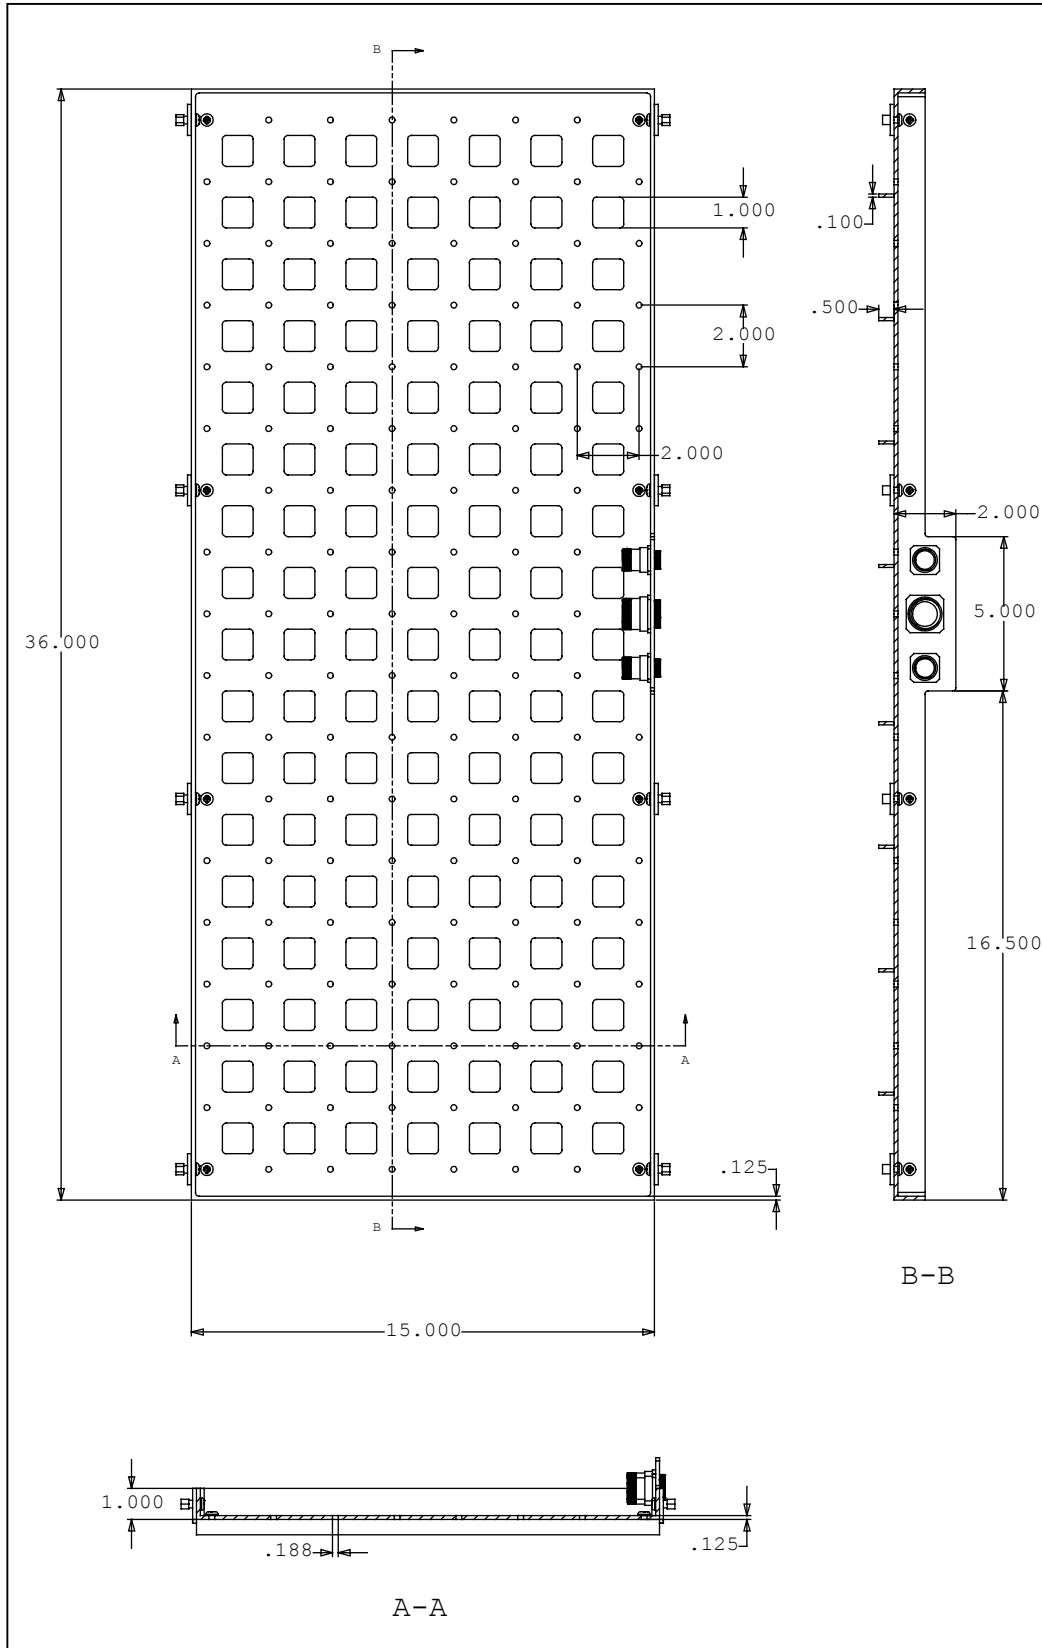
ECOBOX Experiment Tray Dimensional Drawing
